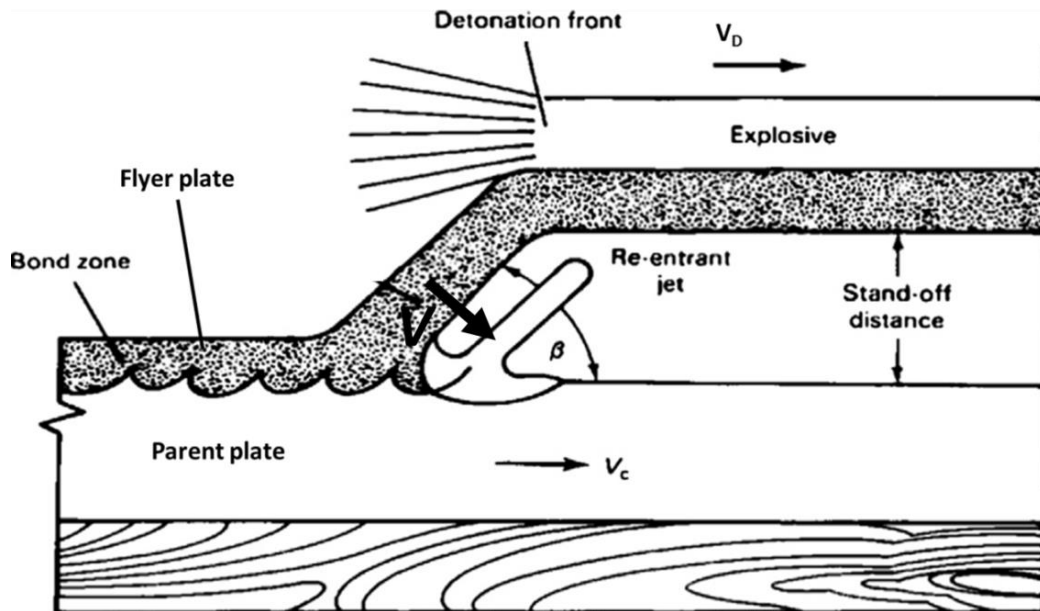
3 Schematic illustration of the explosive welding<sup>46</sup>.
